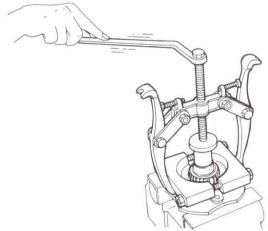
Using a puller to remove the inner bearing (Sec 5)
